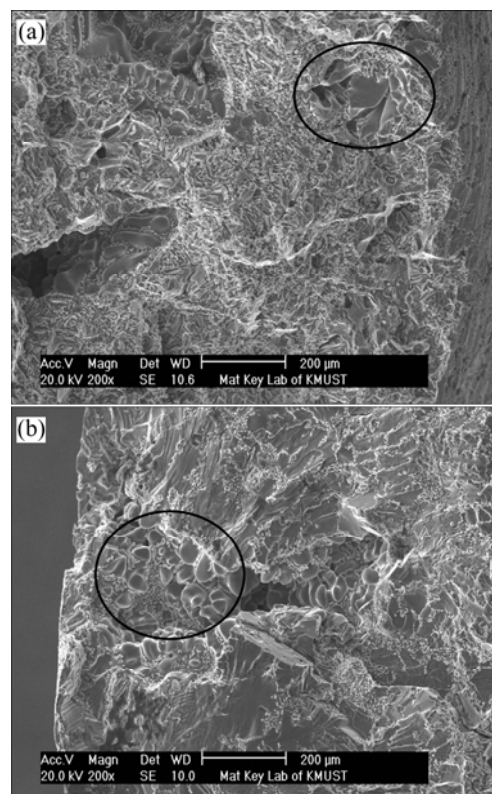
Initiation sites of fatigue crack of specimens 0(a) and 9(b) at 200 °C
